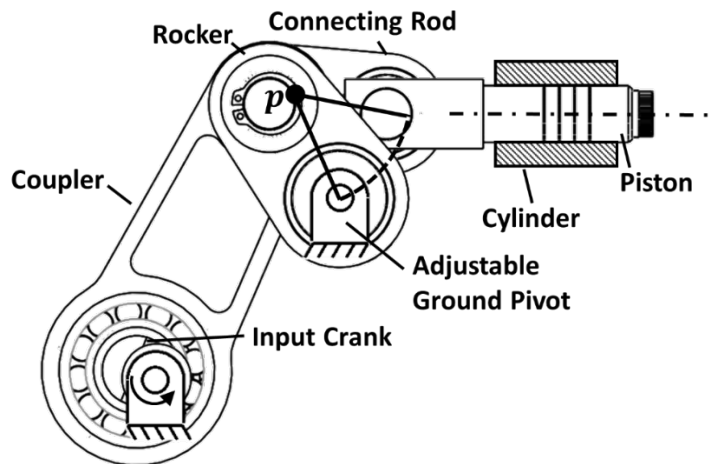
RENDERING OF THE FINAL LINKAGE DESIGN INCLUDING ROLLER ELEMENT BEARINGS
